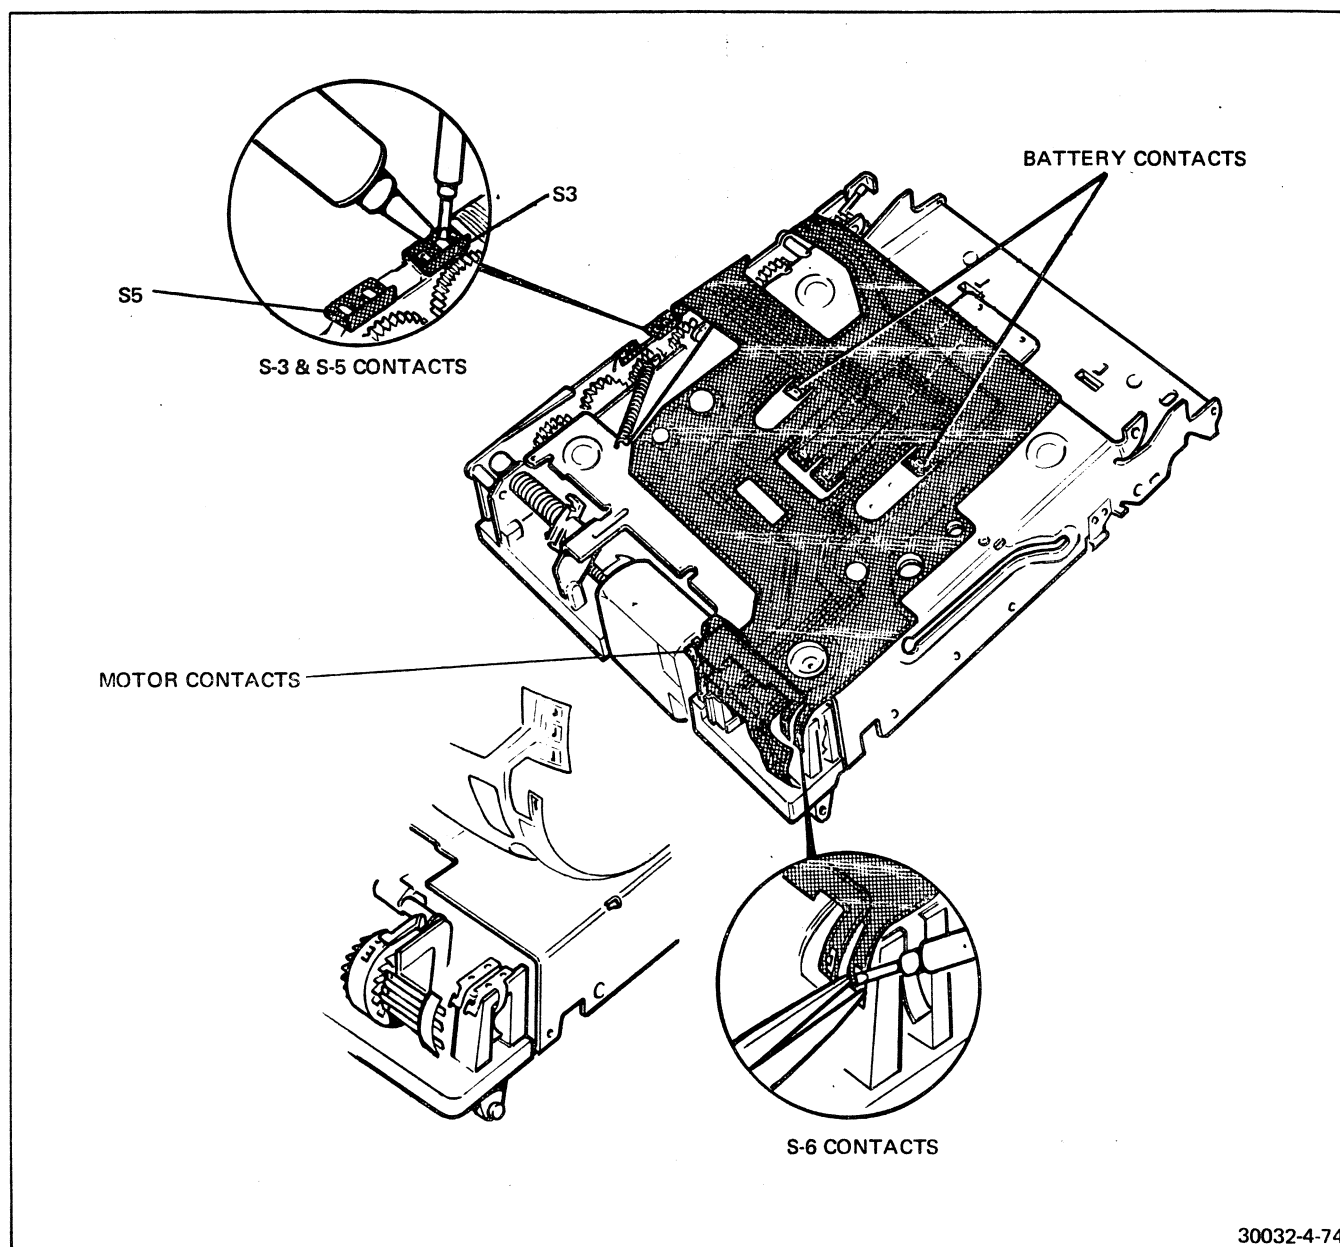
SOLDER POINT IDENTIFICATION
